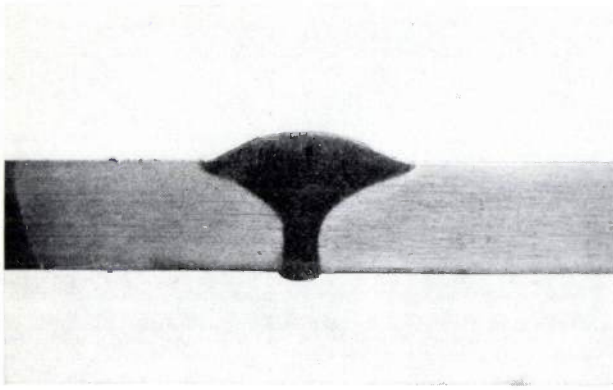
Square-butt weld in plate of 8 mm stainless steel welded by the plasma-MIG method using a thin arc. The filler wire (PZ 6061) had a diameter of 1.2 mm and was also of stainless steel. The plasma gas was argon (6.5 l/min), the shielding gas a mixture of argon (10 l/min) and CO<sub>2</sub> (5 l/min). The diameter of the plasma exit was 6 mm, and its distance to the workpiece was 15 mm. Plasma-arc current 100 A at 50 V. Current in the filler wire 180 A at 40 V. Both electrodes were positive with respect to the workpiece. The rate of travel was 40 cm/min at a deposition rate of 95 grams of filler metal per minute. Under these conditions the critical current through the wire at which the arc starts to rotate is approximately 250 A.
